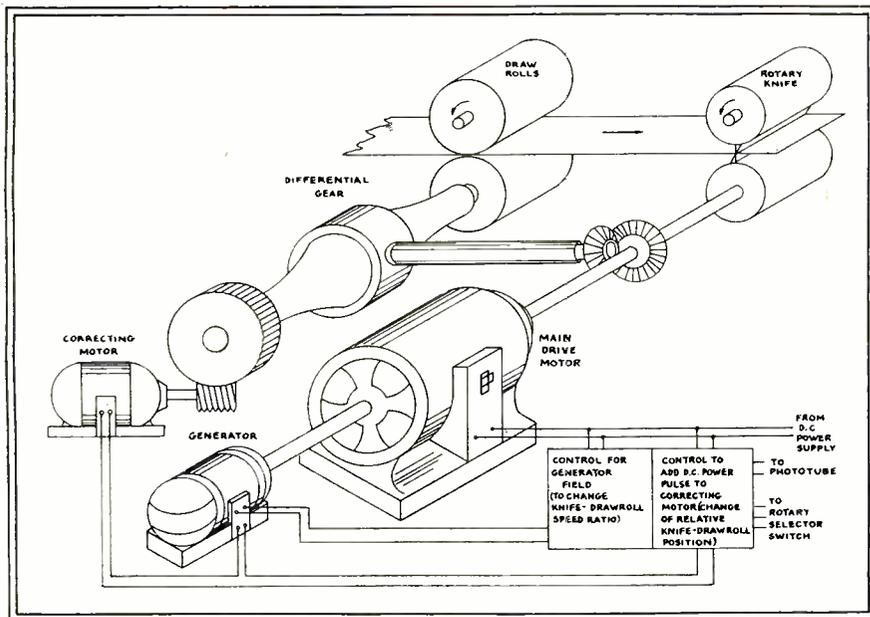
System incorporating both speed and space correction for extreme accuracy in maintaining register at a high-speed rotary knife of a packaging machine
